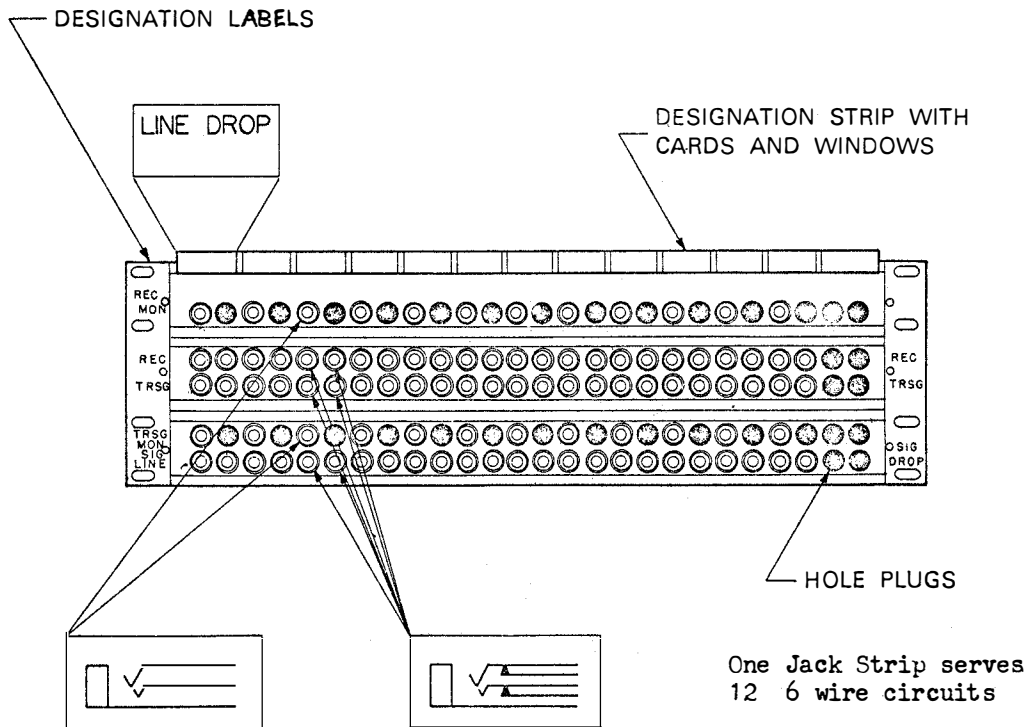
CIRCUIT JACK MODULE ASSEMBLY
